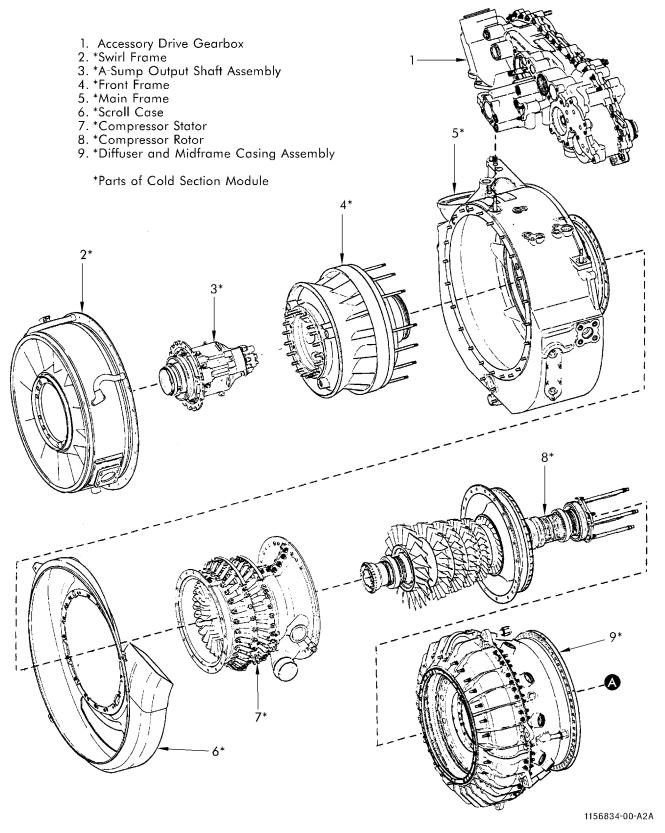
(T700) Major Engine Components (Sheet 1 of 2)
